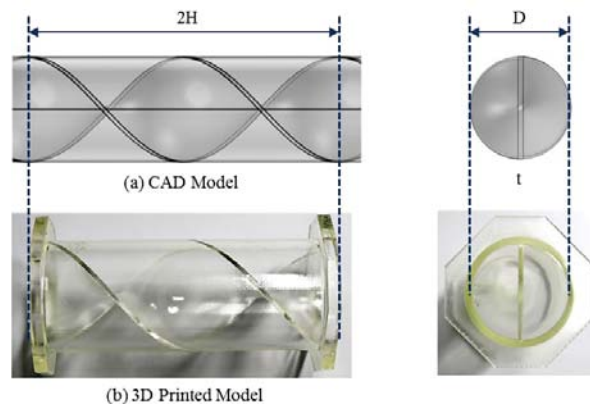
Geometry of Test Section and 3D-Printed Test Section.
